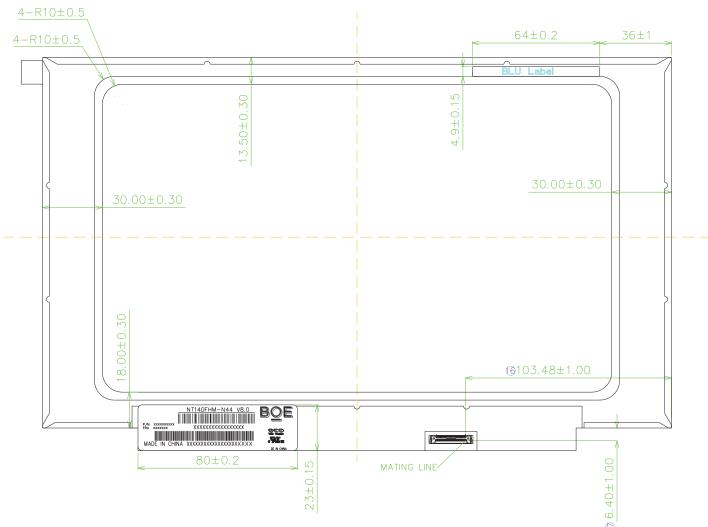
TFT-LCD Module Outline Dimensions (Rear view)
